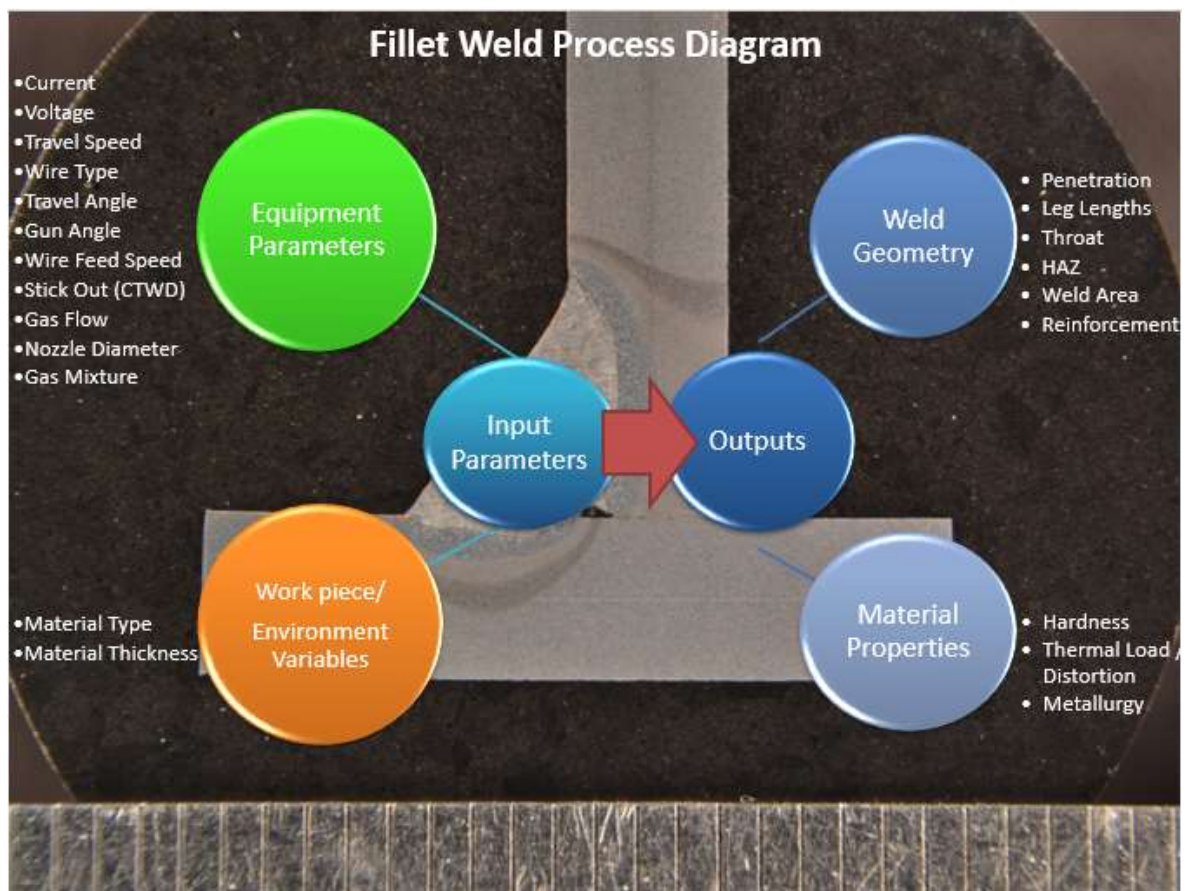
GMAW Fillet Weld Process Diagram
